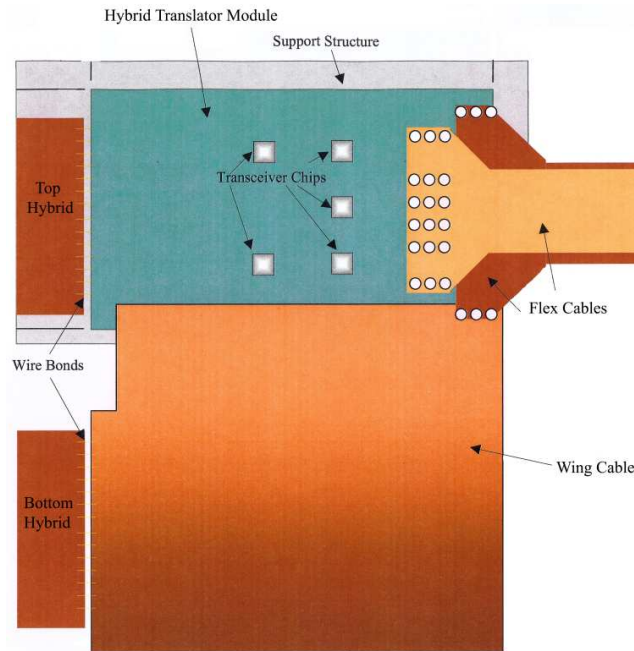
HTM assembly showing the wing cable to connect the top and bottom side boards and the readout flex cable.
